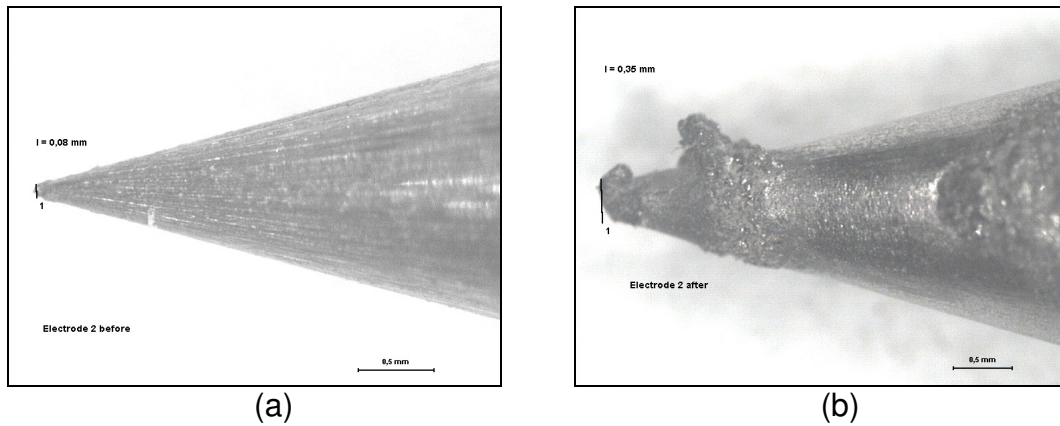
Angle of Electrode 2 used for experiment number 3: (a) before welding $\leq 32.17^\circ$; (b) after welding $\leq 37.62^\circ$.
